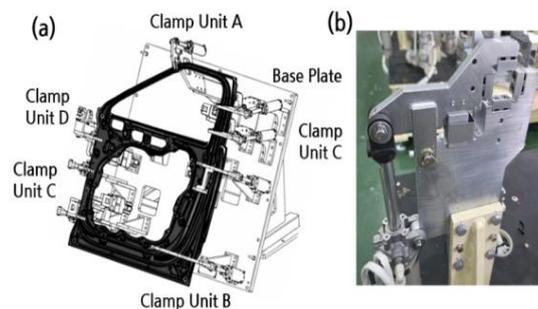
Jig System and Jig Modules for Automotive Chassis Work
